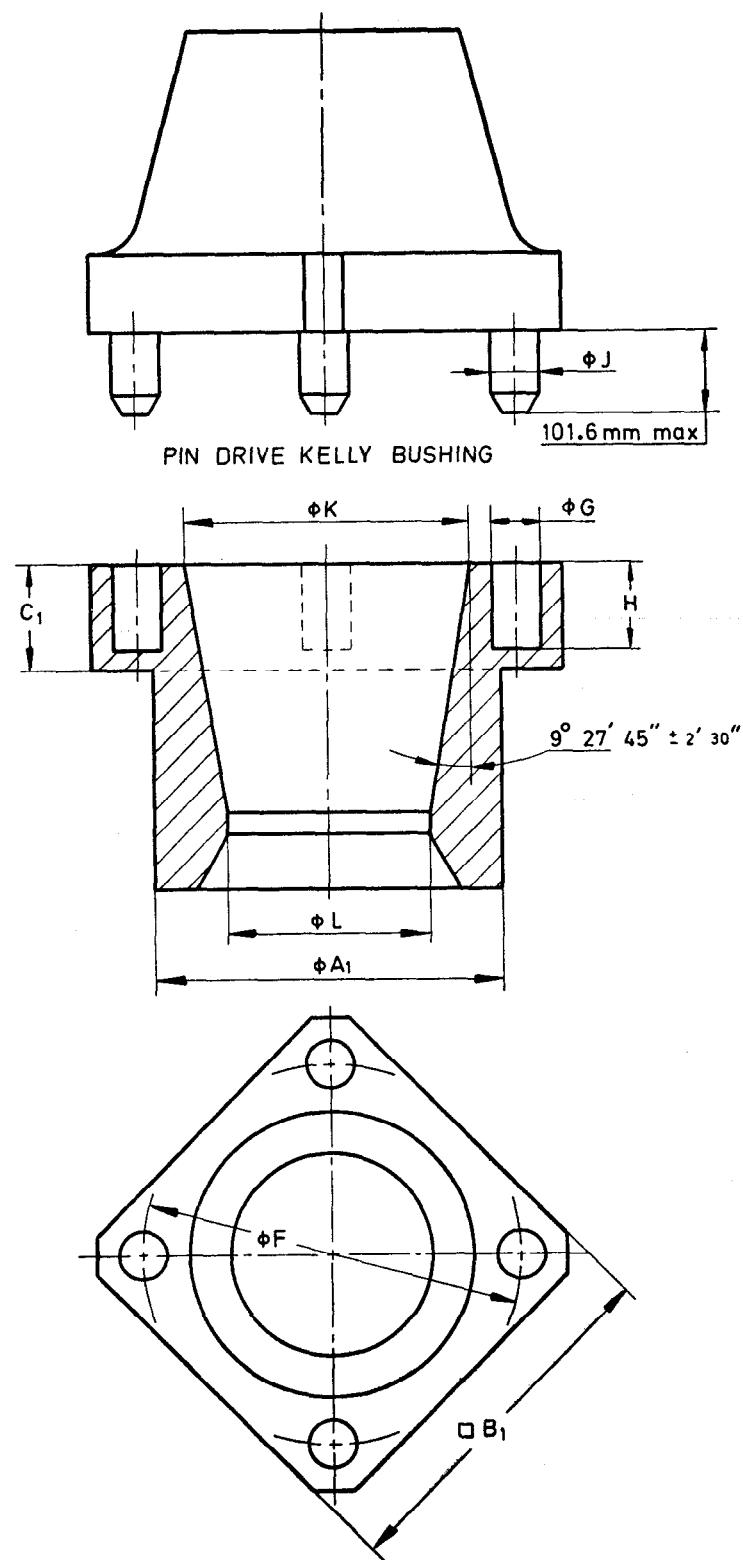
FOUR PIN DRIVE MASTER BUSHING AND KELLY BUSHING
